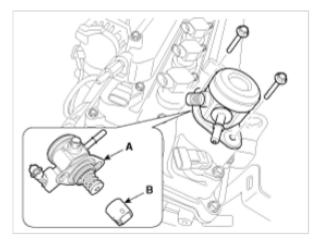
Identifying High Pressure Fuel Pump And Roller Tappet Courtesy of HYUNDAI MOTOR AMERICA
